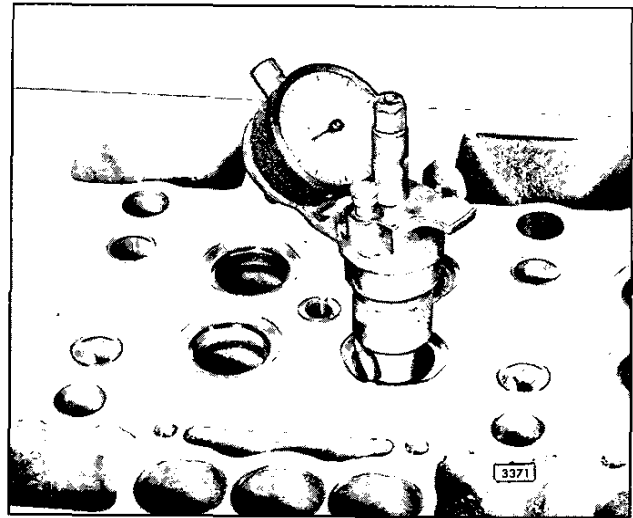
Checking Relative Concentricity at Valve Seat Insert with Relation to Valve Guide
